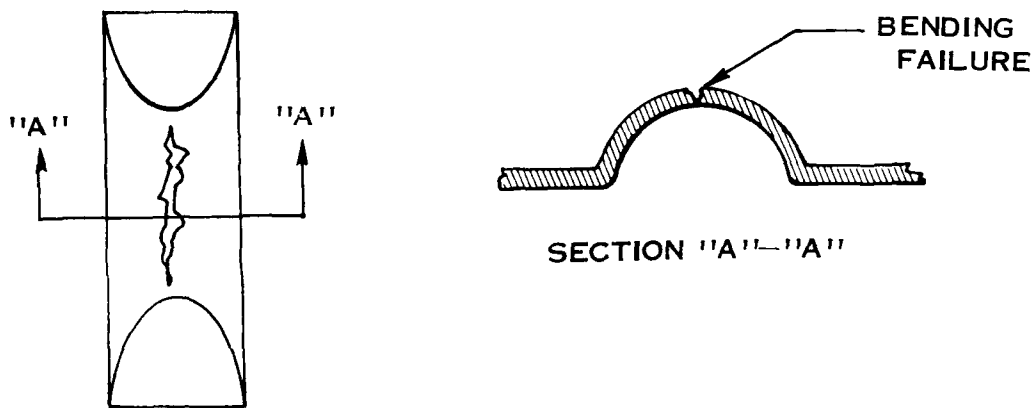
BENDING FAILURES IN RUBBER BEADING
